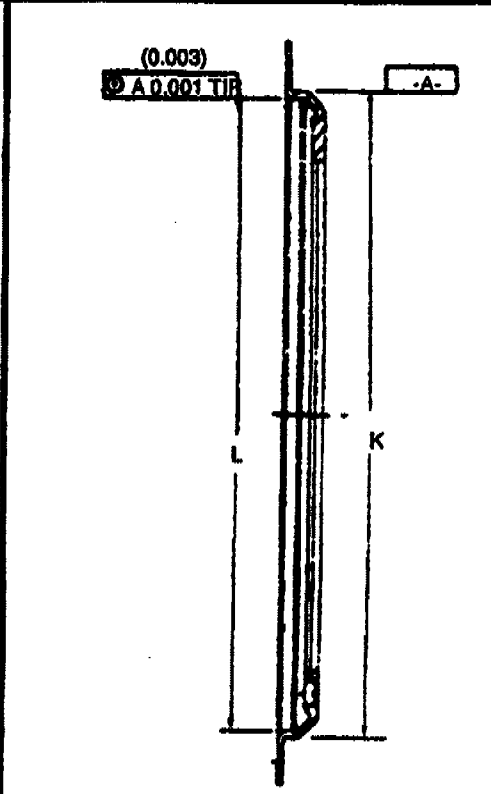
Reduction Gear Assembly Dimensional Inspection Locations (T53-L-15) (Sheet 1 of 2).
